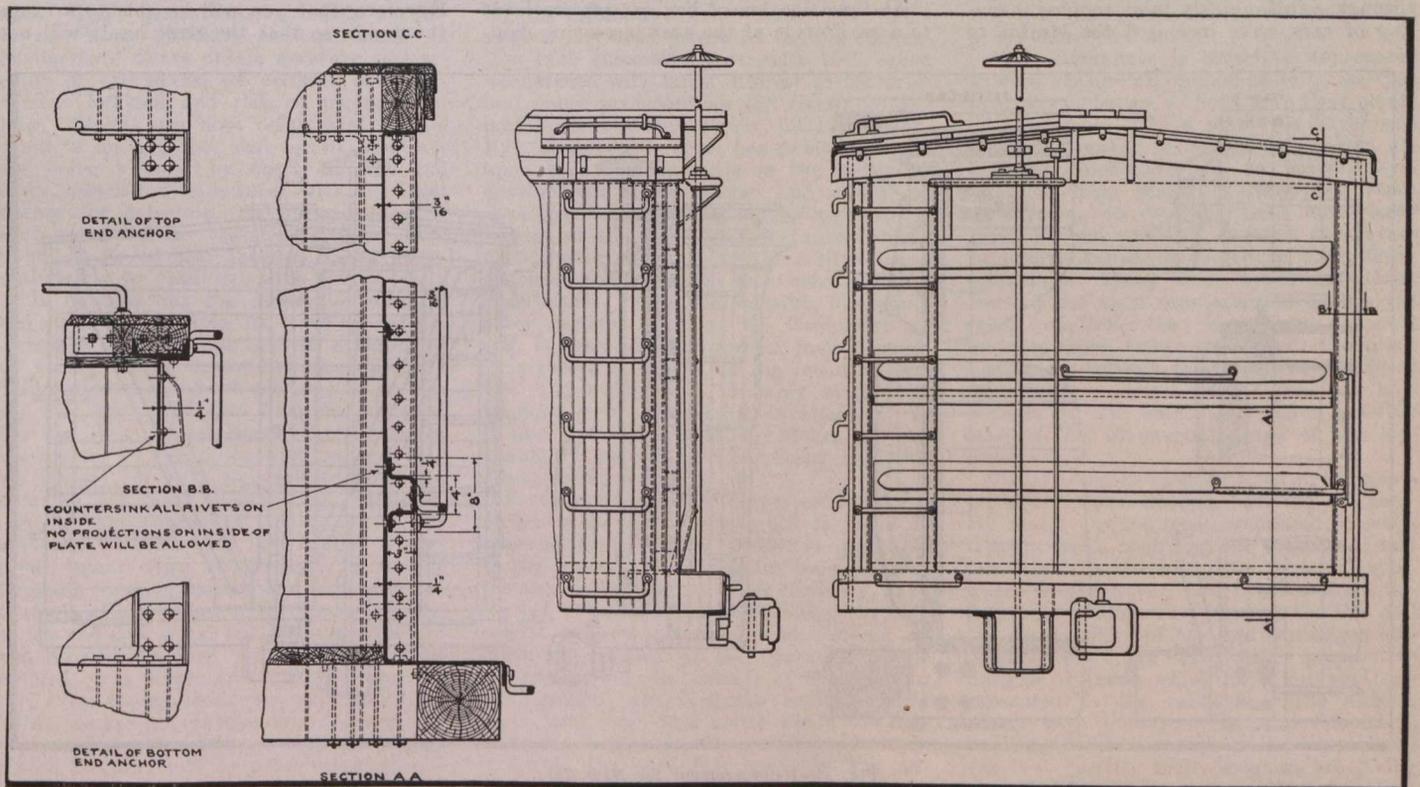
Reinforcement of Wooden Cars to Replace Broken Ends.
